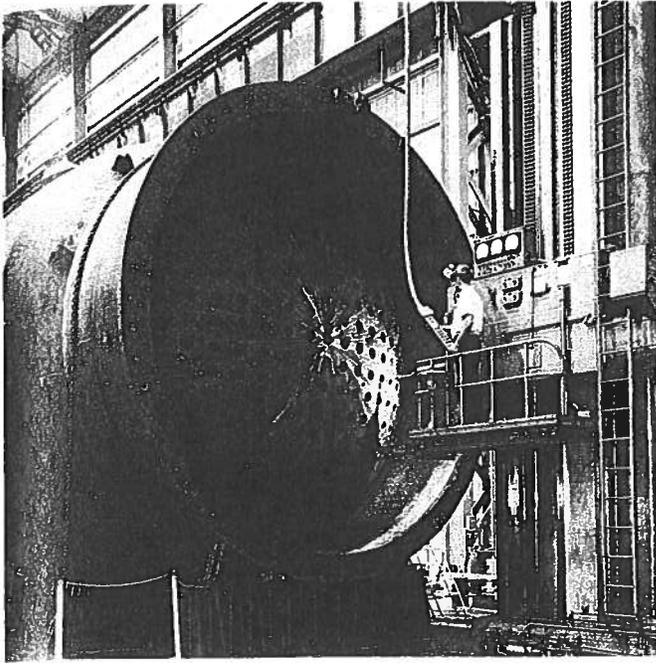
This machine operator is responsible for the precision drilling of holes. (CBI Industries, Inc.)
